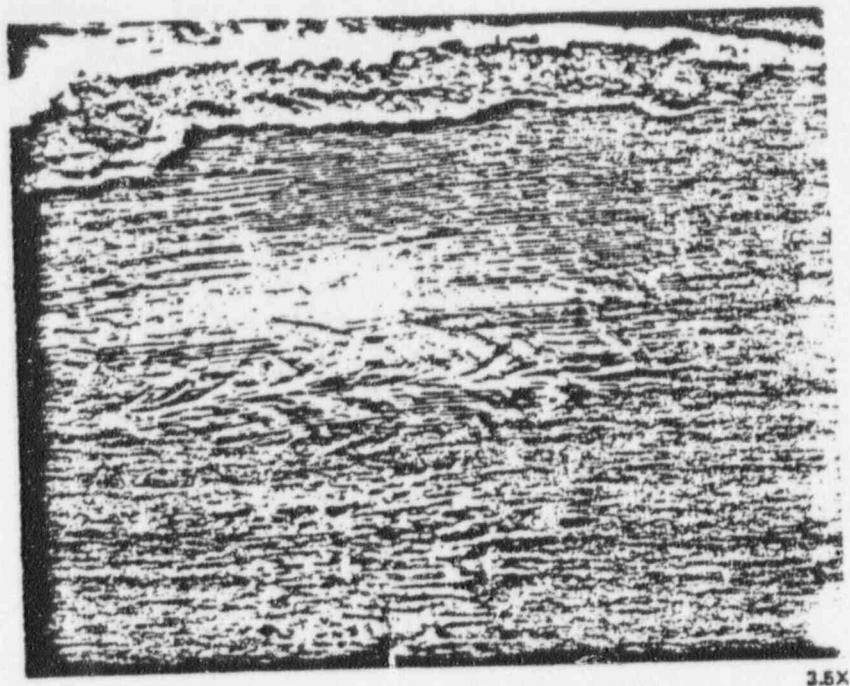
Weldment E19A Showing Gravel and Polished Inside Surface 65 RMS
